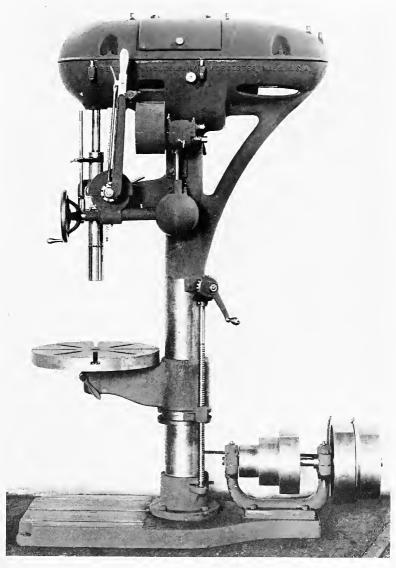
Fig. N. — Twenty-one-inch ball-bearing drilling machine. (Courtesy of Reed-Prentice Company.)
